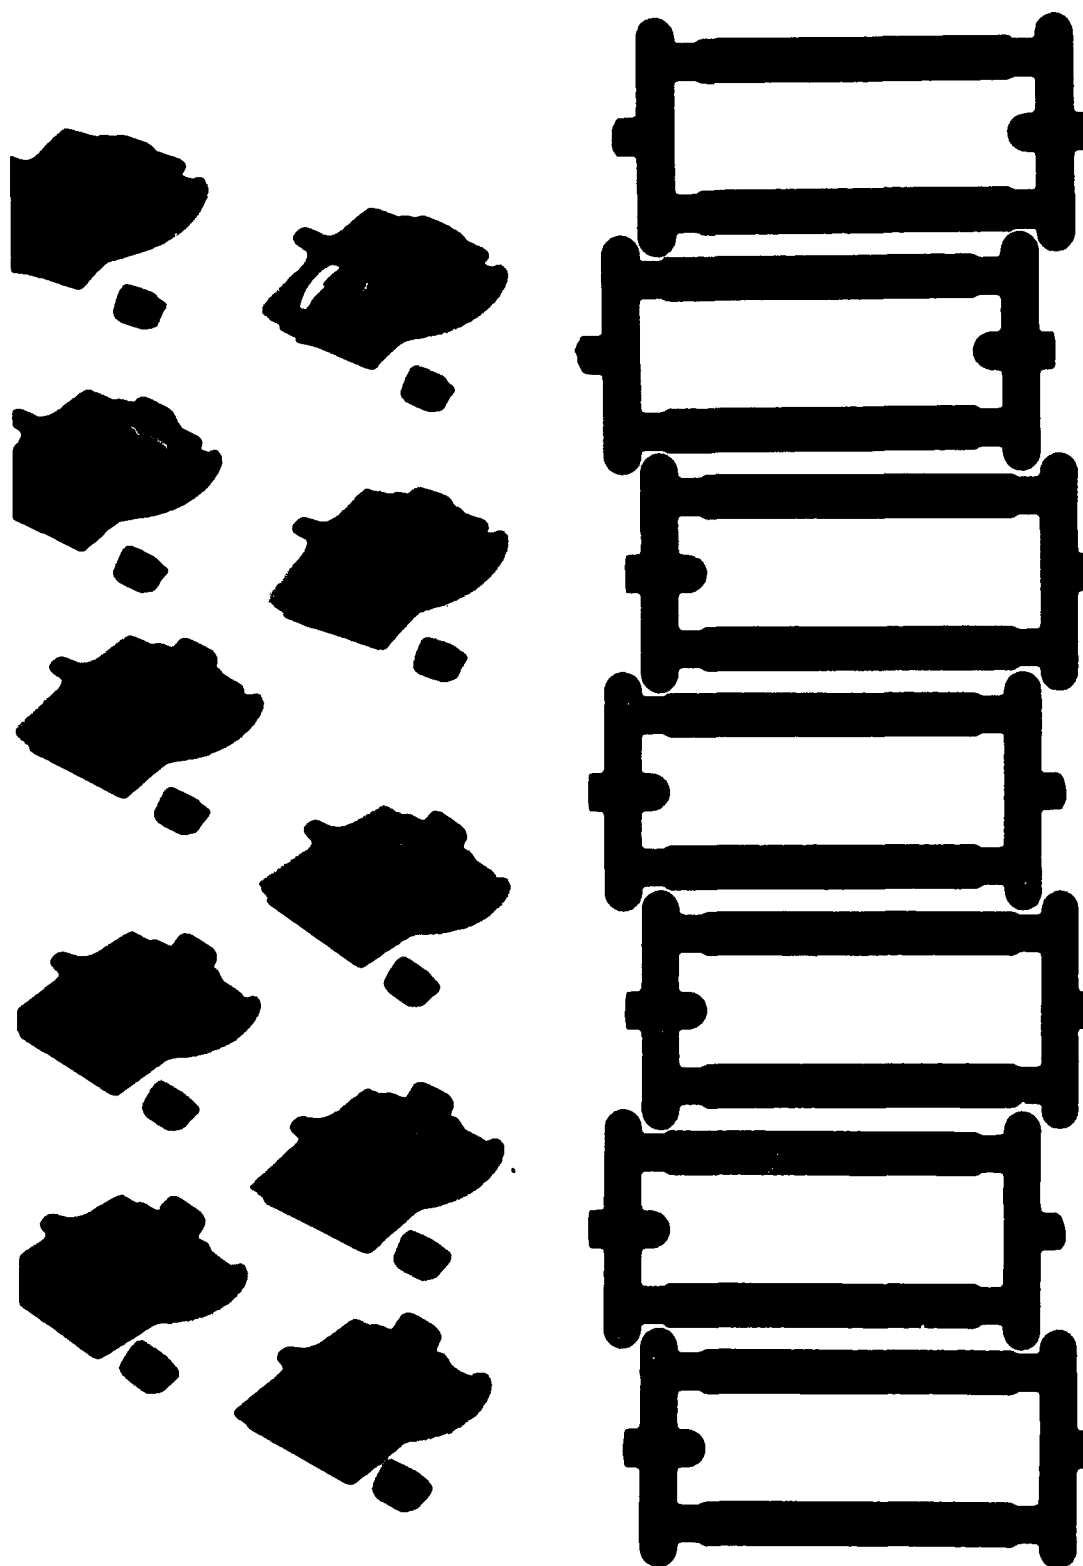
X-Ray Radiograph Showing Injection-Molded Stator Vanes and Test Bar Sets Using Batch 116-25
